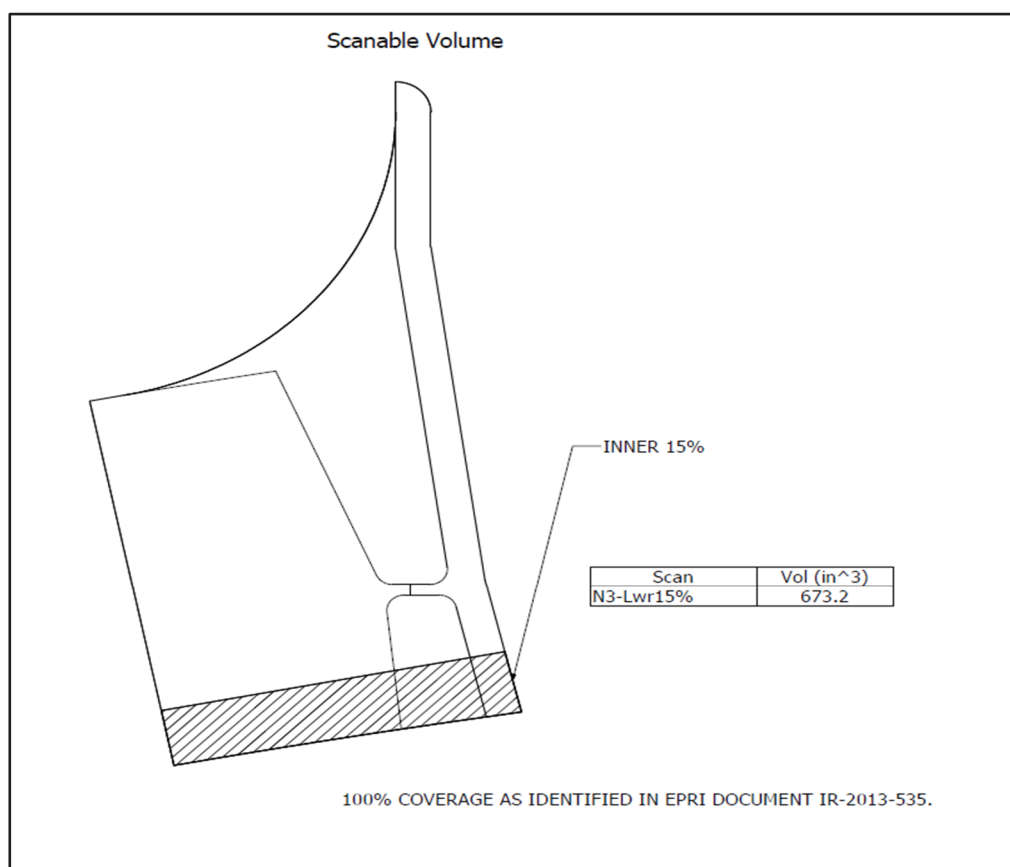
Weld N3B-NV, Inner 15% Coverage Achieved
